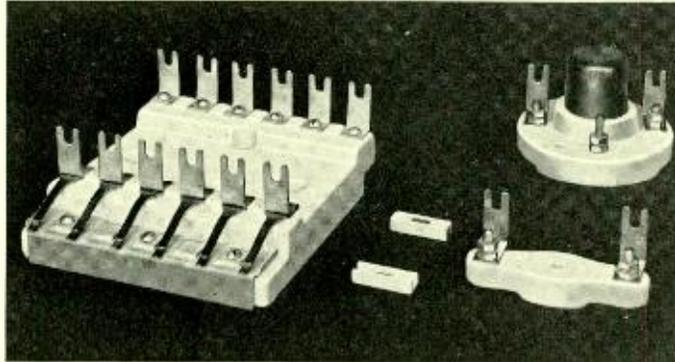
In these assemblies involving porcelain bases, note how metal parts are attached by screws through molded holes in contrast to metal inserts molded in place
